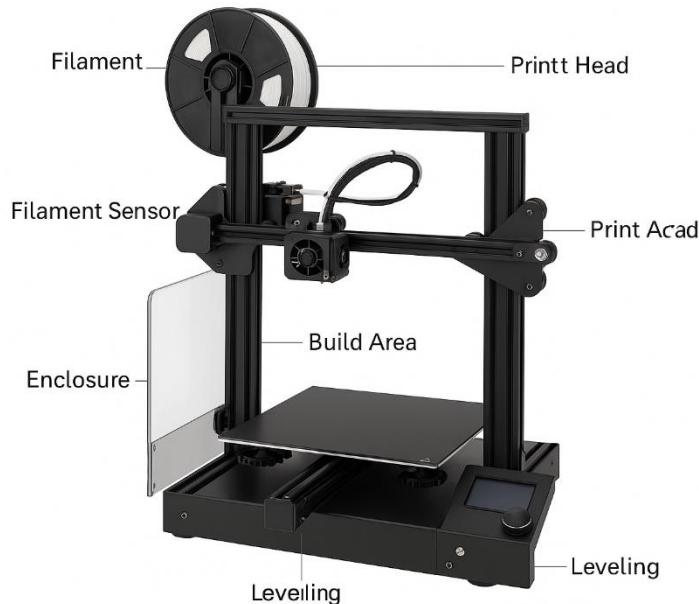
Parts of a FDM 3D printer machine. Open IA (2025).
